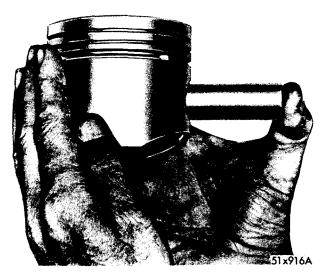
Fitting Piston Pins in Piston (Typical)
